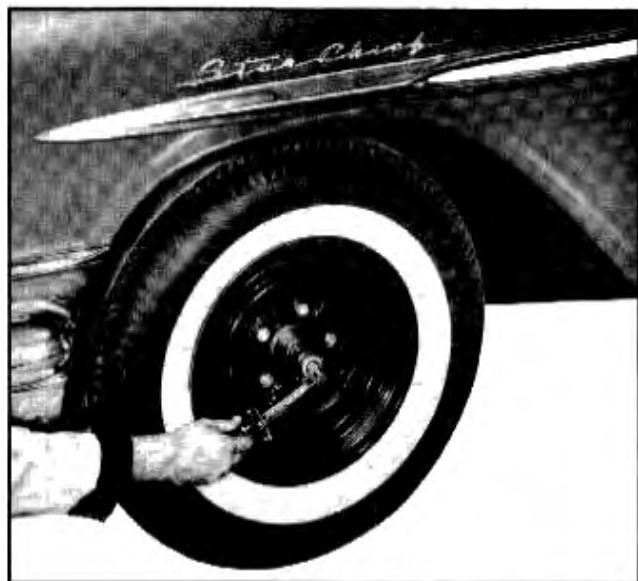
Adjusting Wheel Bearing Using Torque Wrench
